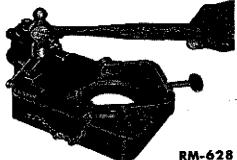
Correcting Insufficient Clearance on Governor Arm
